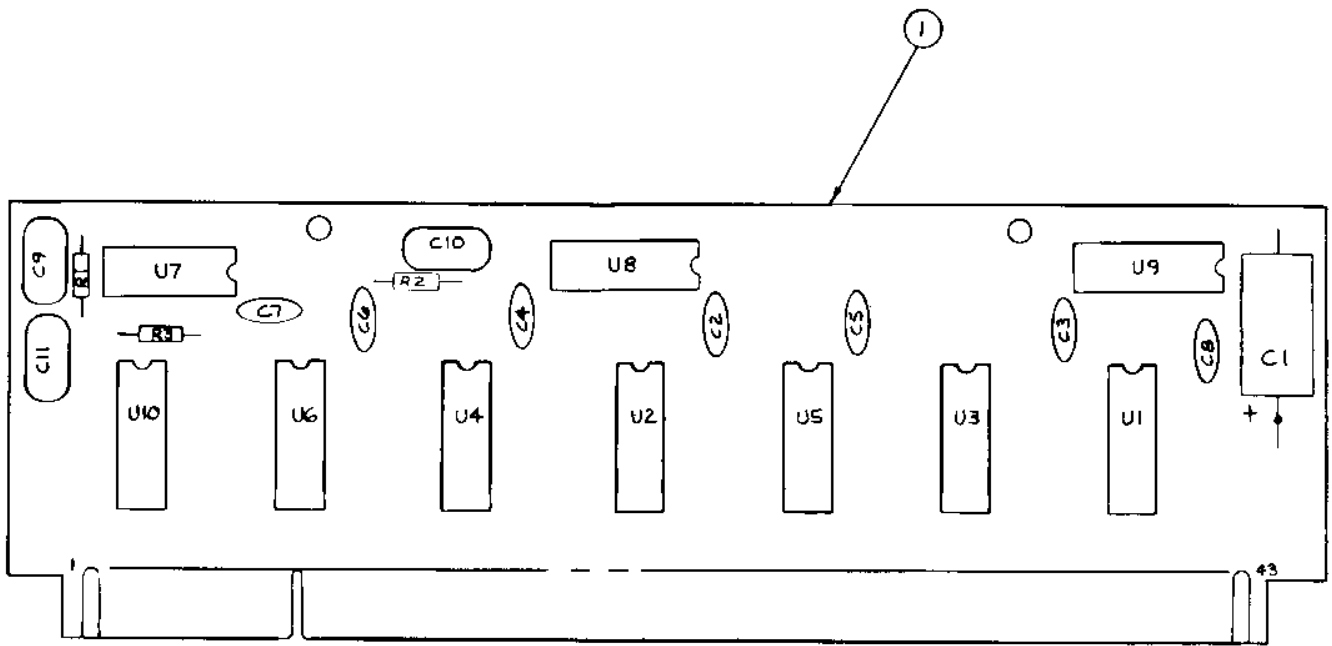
Time Display Driver PCB (A20A2) Assembly Drawing
